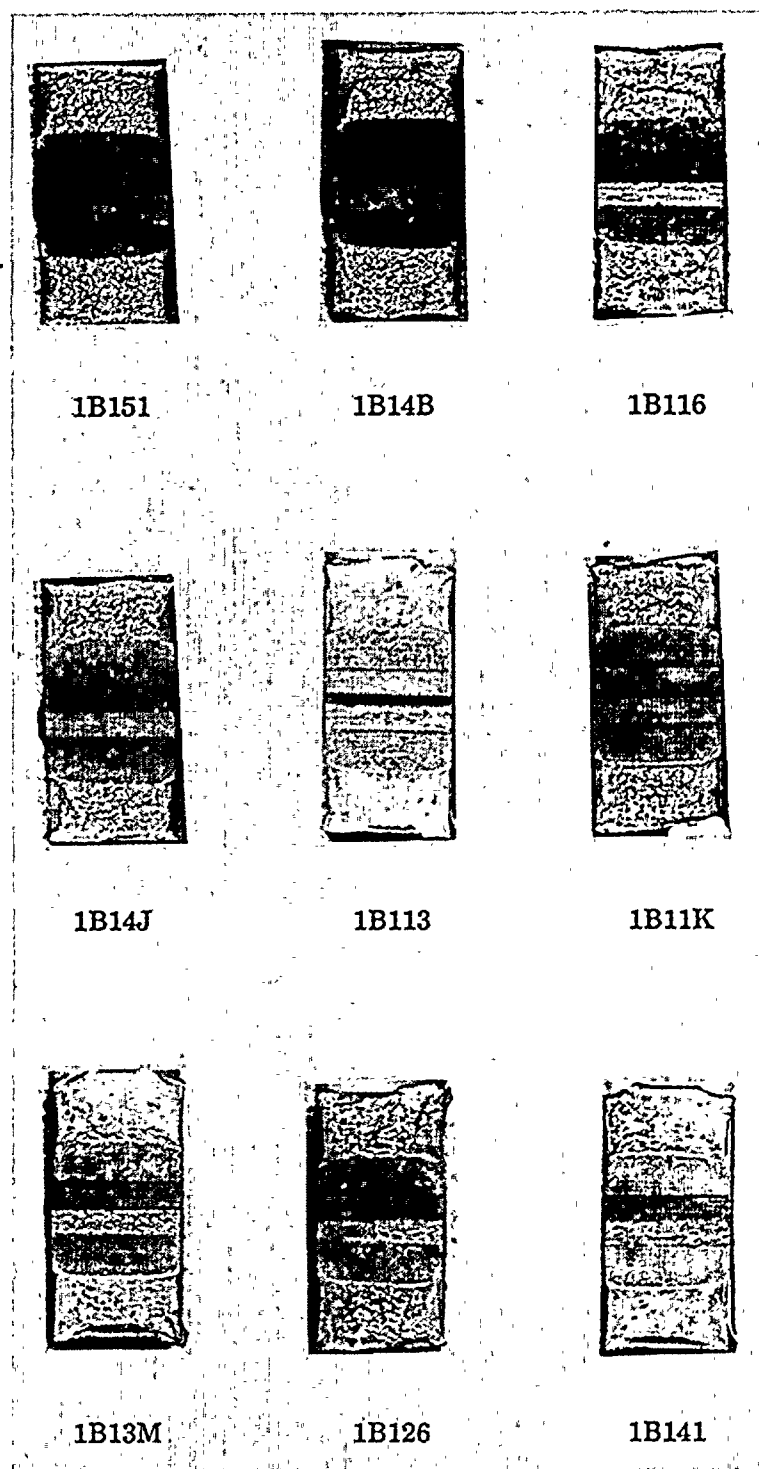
Precracked Charpy Impact Specimen Fracture Surfaces for Palo Verde Unit
